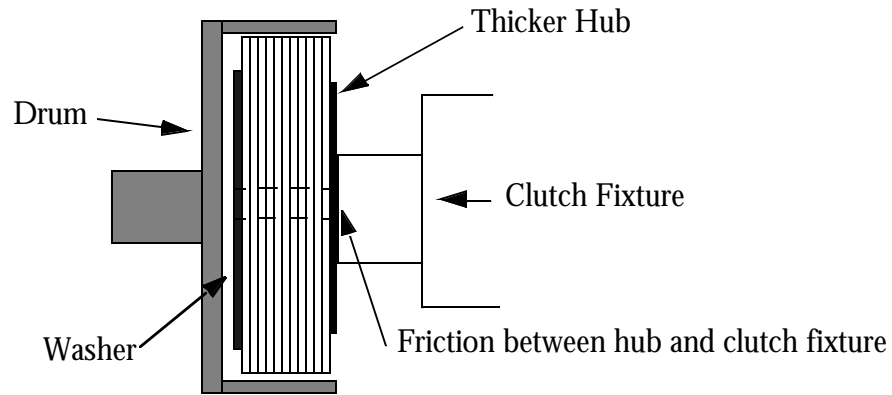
Friction between clutch and clutch fixture made the clutch not disengage from the drum.
